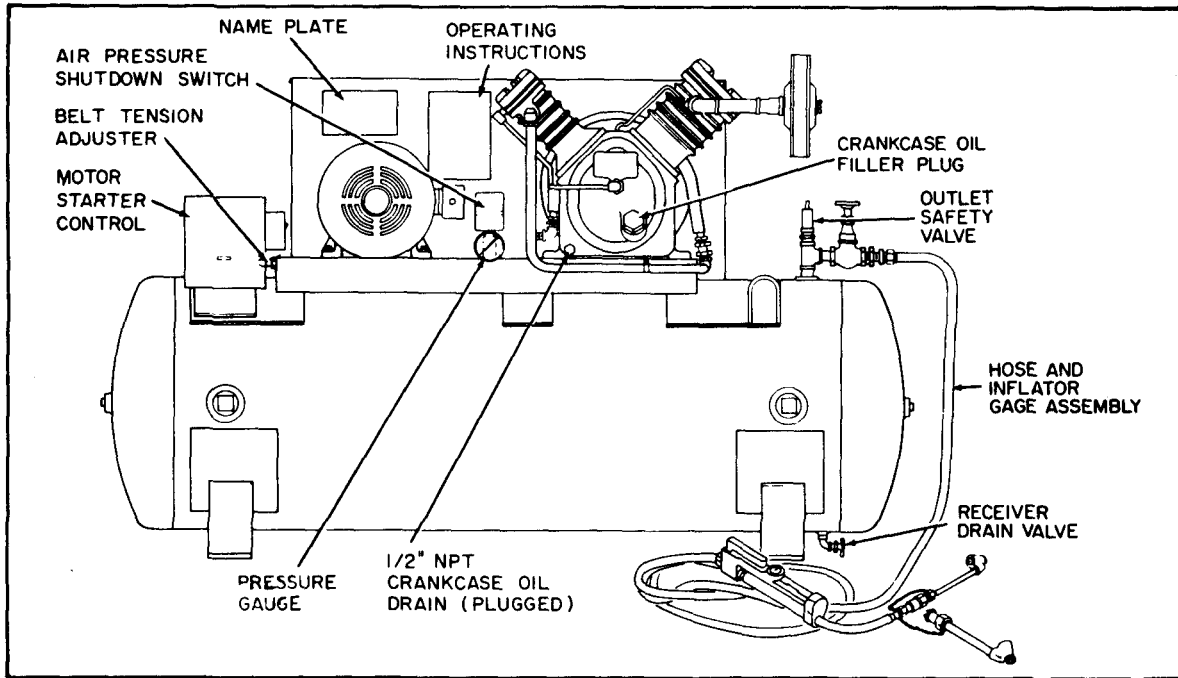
Model 242D7-1-1/2 Compressor, Front View
